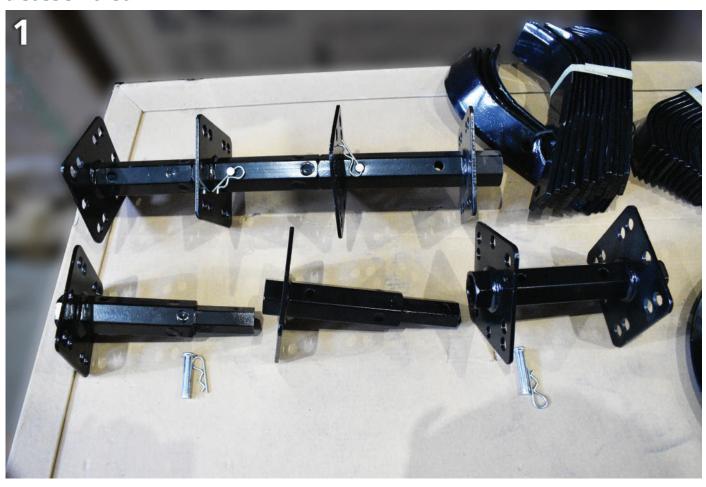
Each cutter (left and right) consists of several sections. The cutting edge of the knives should be at the front (in the direction of travel of the cultivator).
